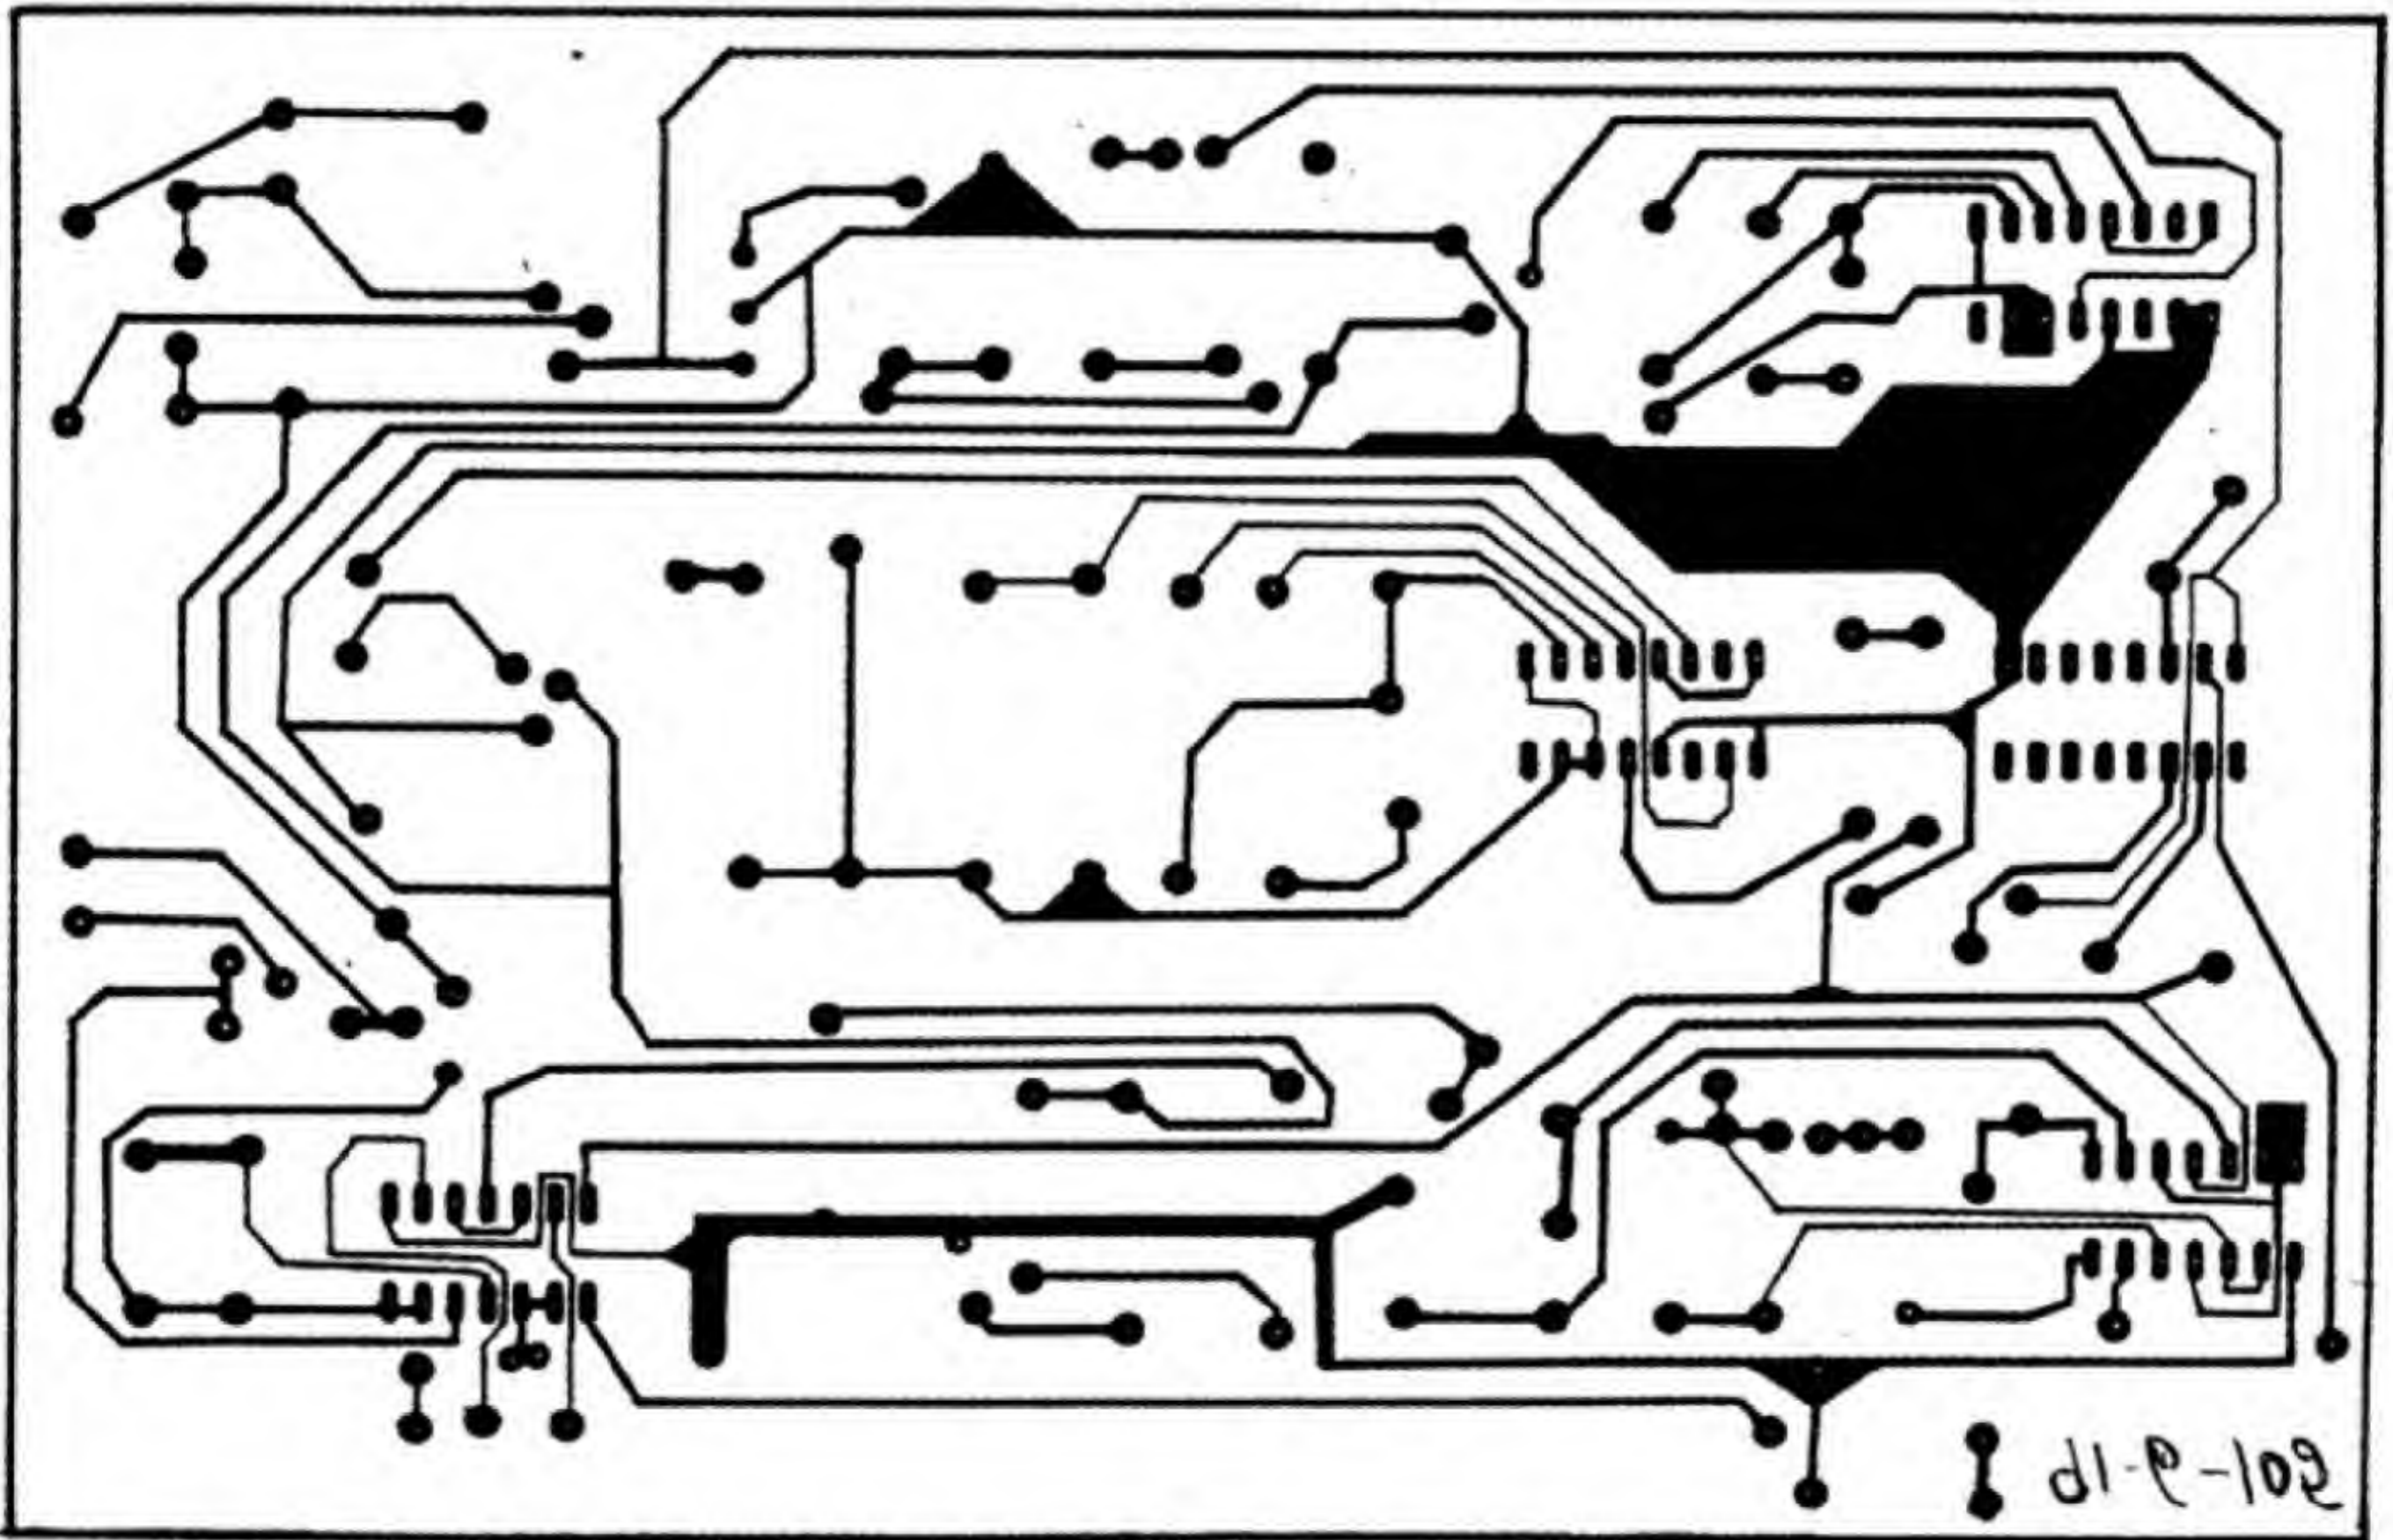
Actual size PCB layout for HCH, alarm and sleep circuit and part of day counter circuit.
